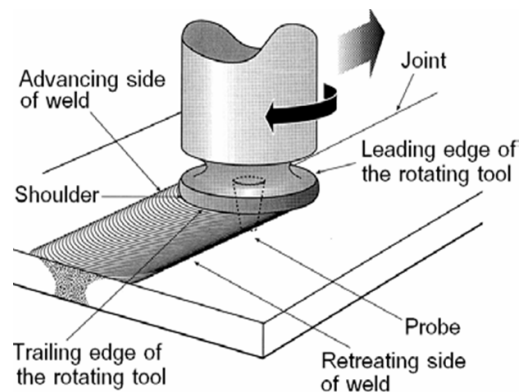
Schematic drawing of friction stir welding (FSW).
